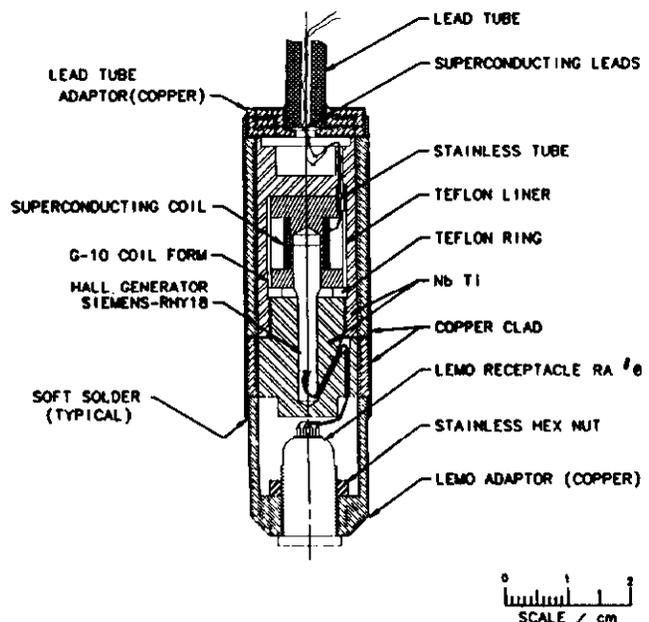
Shielded capsule containing the field coil and the Hall probe in a superconducting cavity.
